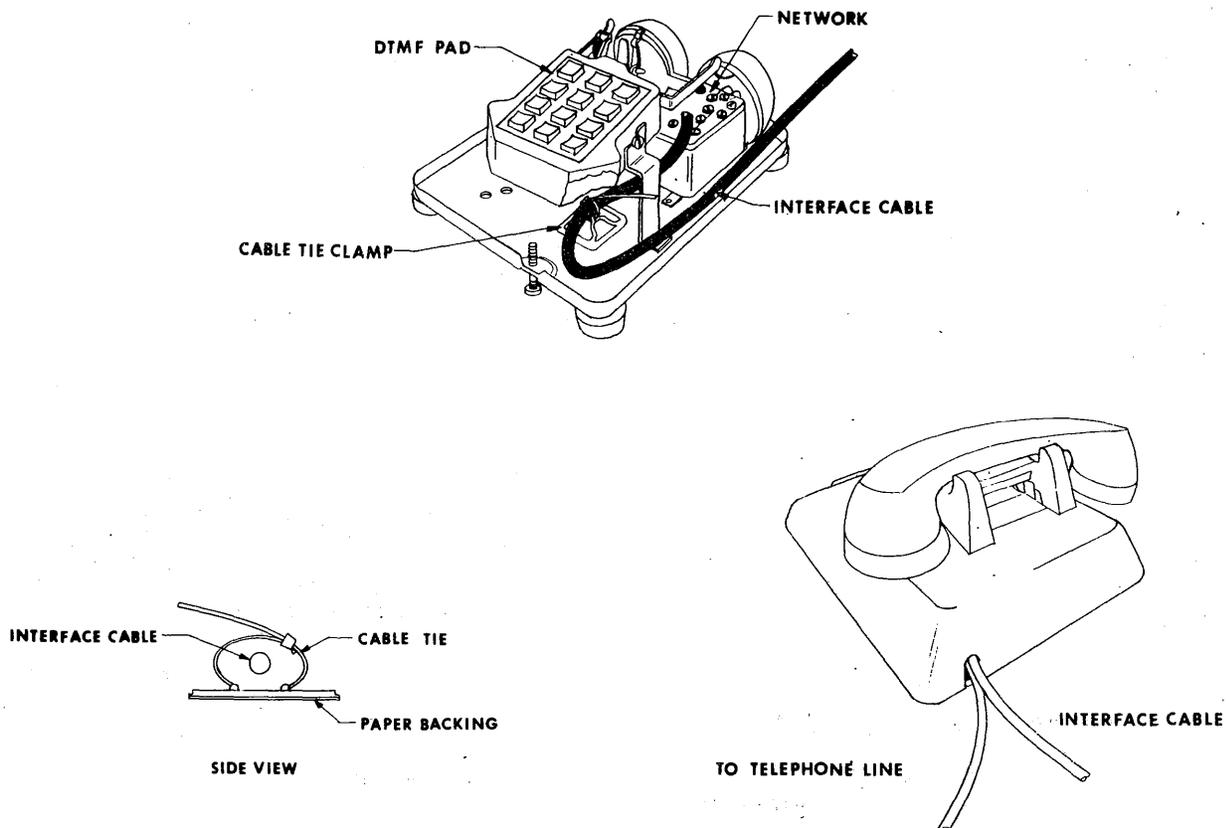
Connecting Interface Cable to Standard Desk Sets
